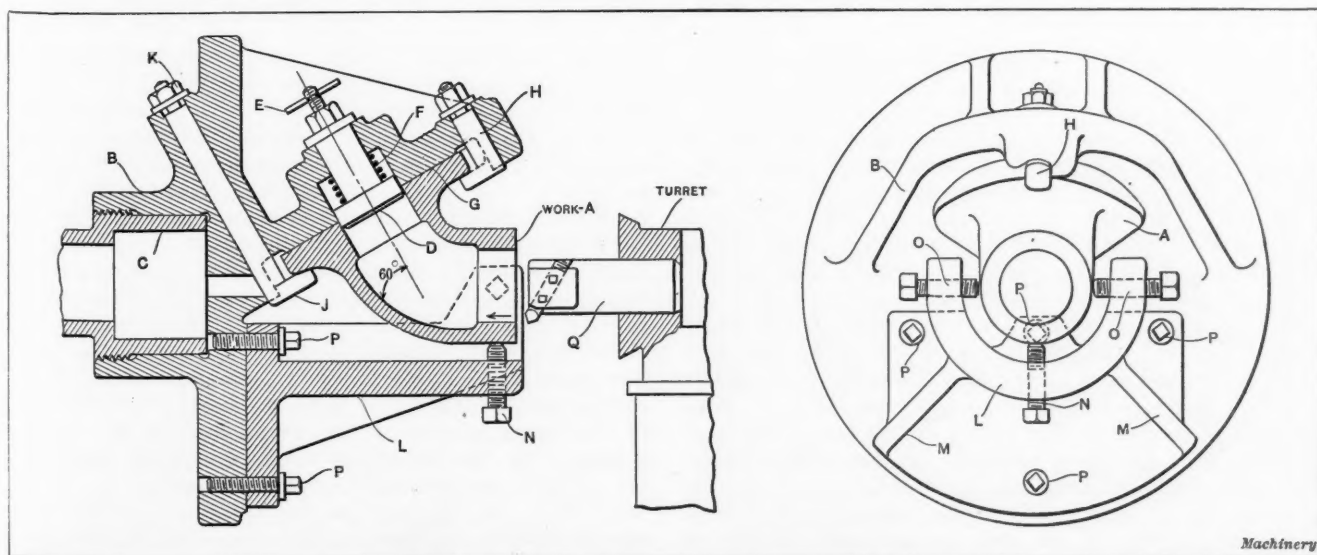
Fixture for machining Angular Cast-iron Fitting
